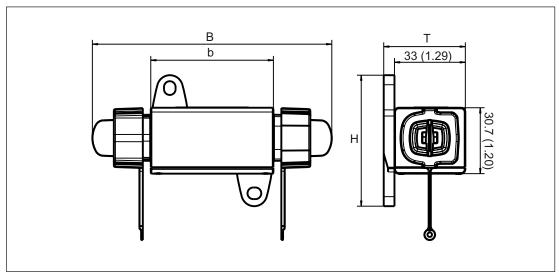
Dimension drawing, DRIVE-CLiQ coupling
